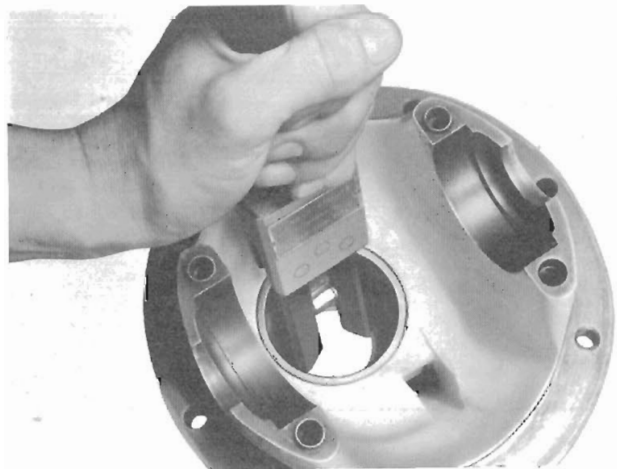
Using tool No. S123A to remove pinion bearing outer rings
